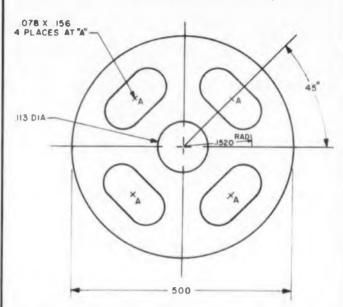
Multiple wire connections can be made to a terminal plate fashioned from a piece of metal.
